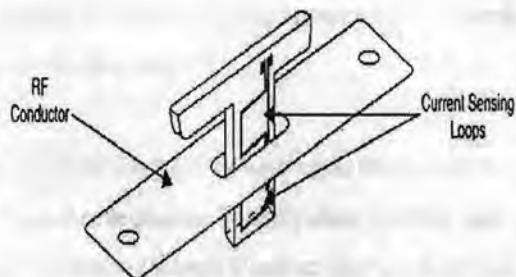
RF Power Conductor and Sensor PCB Location (reproduced from [1])
